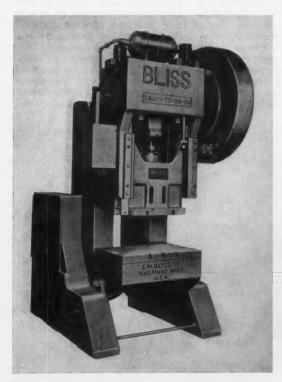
Bliss open-back, inclinable 75-ton press equipped with new air clutch
